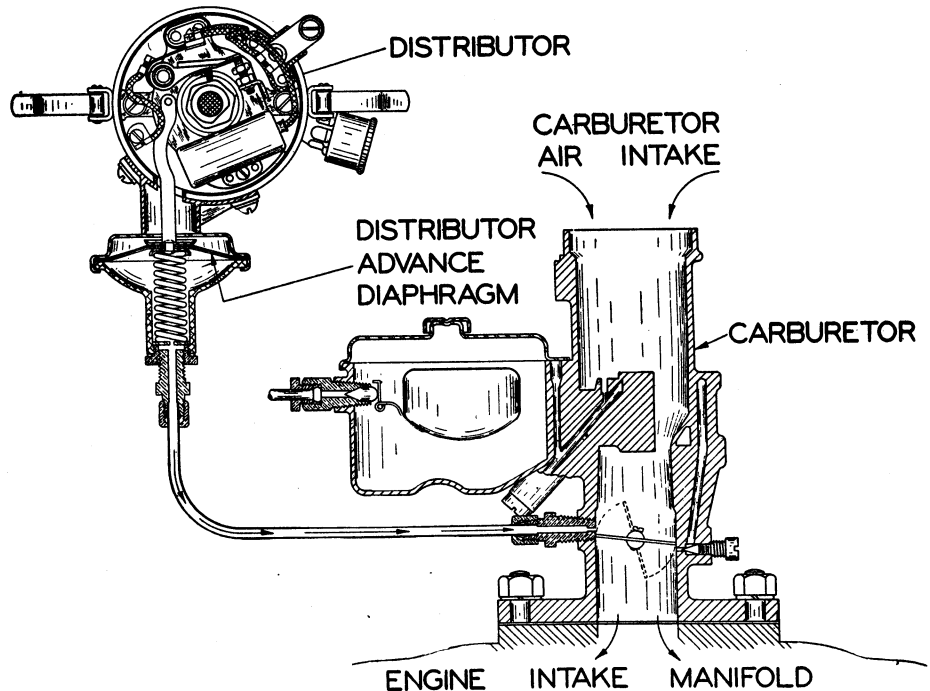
Auto-Lite vacuum advance mechanism of type mounted on side of distributor. Breaker plate is supported on a ball bearing, and the breaker plate alone rotates in the housing as vacuum conditions change
